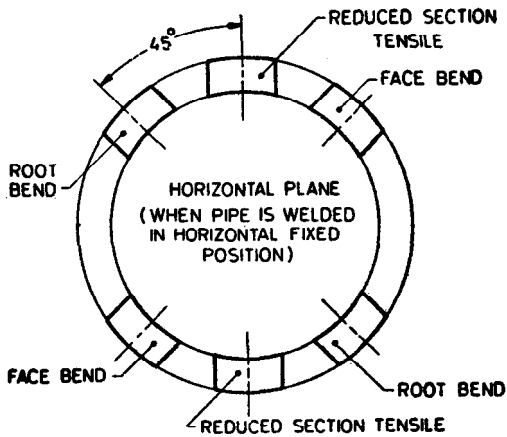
ORDER OF REMOVAL OF TEST SPECIMENS FROM WELDED PIPE
